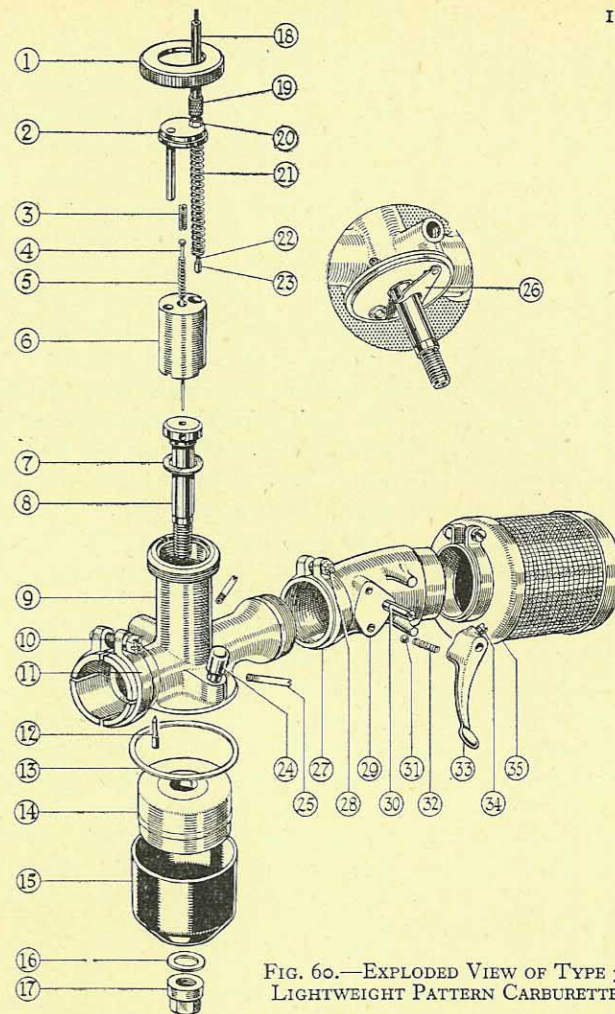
EXPLODED VIEW OF TYPE 3/1 LIGHTWEIGHT PATTERN CARBURETTER.
